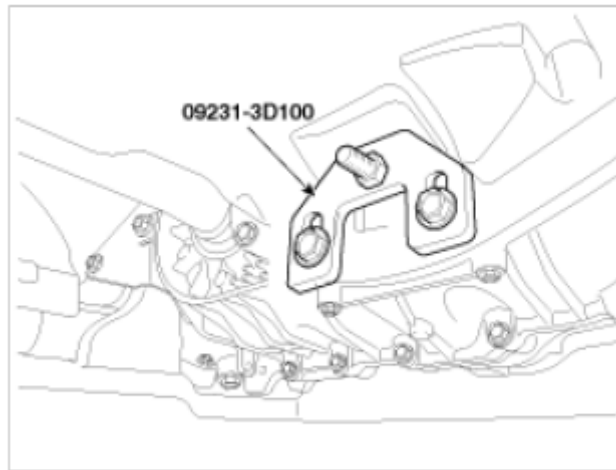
Identifying Dust Cover And Transaxle Mounting Bolts
